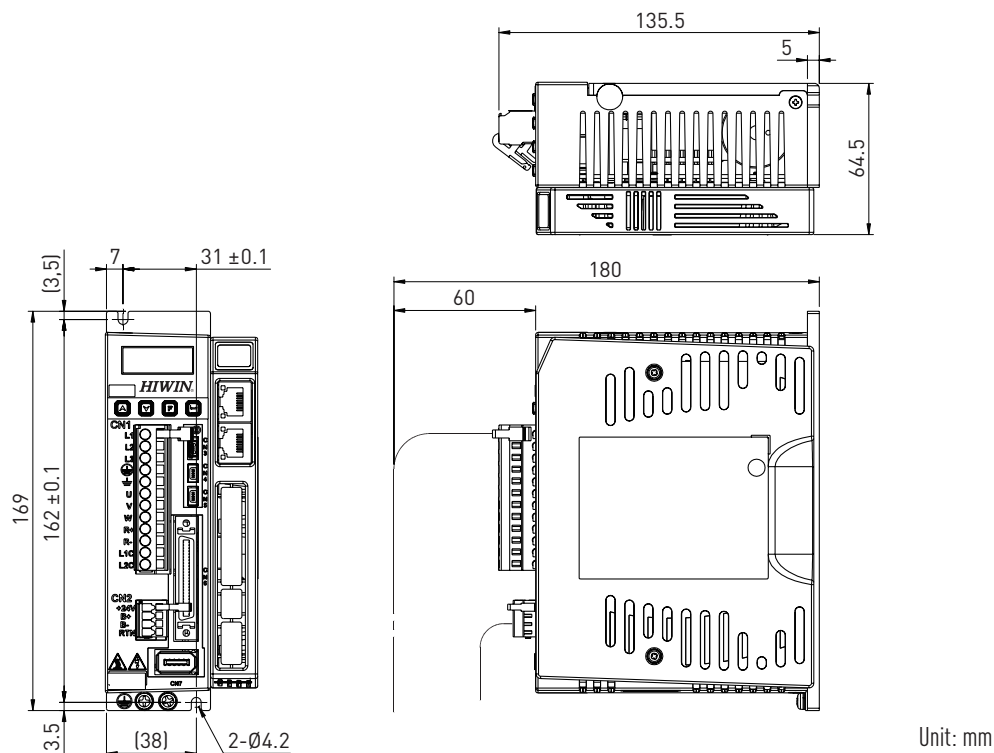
Dimensions D2(T)-01xx-F-xx and D2(T)-01xx-E-xx
